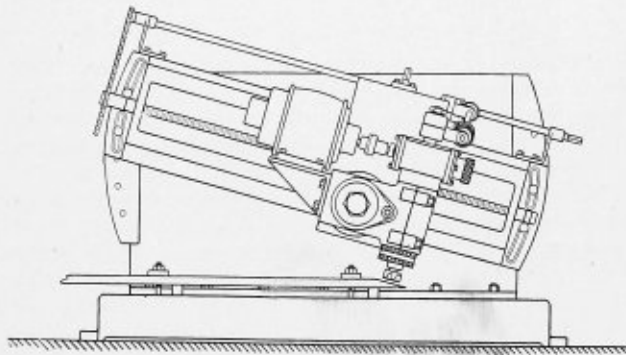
Front View of Scarfing Machine with Bevel Fixed for Operation on Flat Plate
